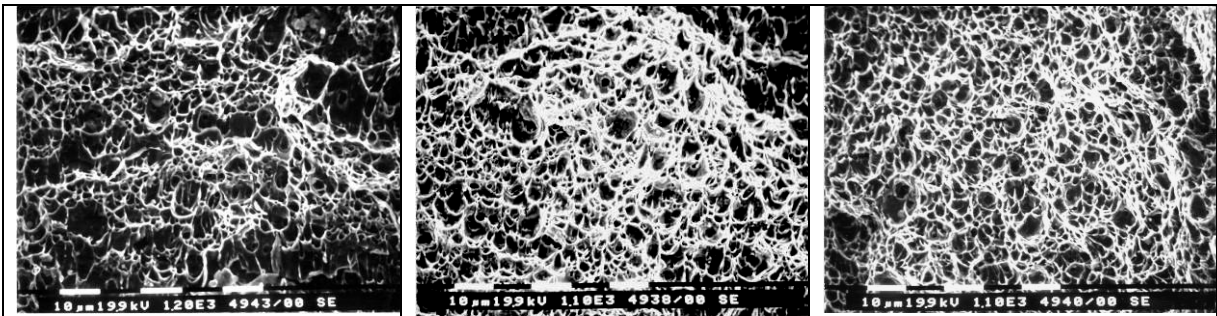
Ductile fracture with dimples for WM at 97°C for 9.3 mm/s, 12.3 mm/s, and 15.3 mm/s welding speeds.
